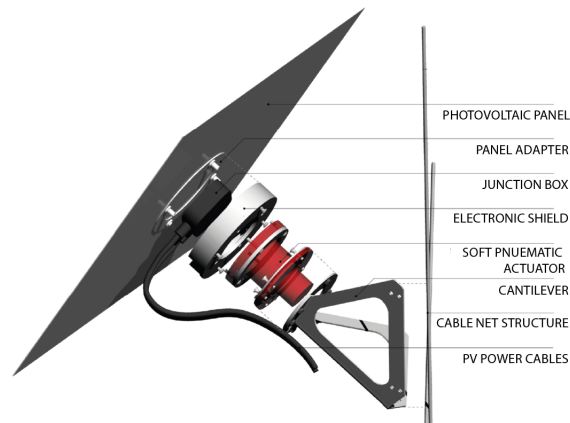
Exploded view of an ASF module mounted on a cable net supporting structure
